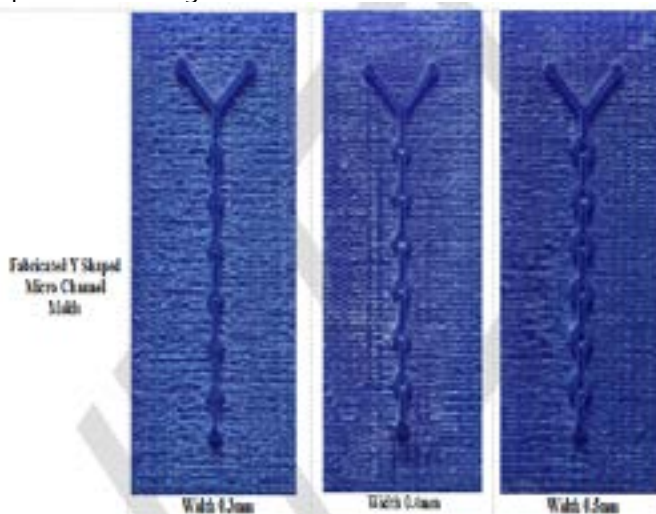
Y-shaped Micro Channel molds fabricated using CO2 laser machining
